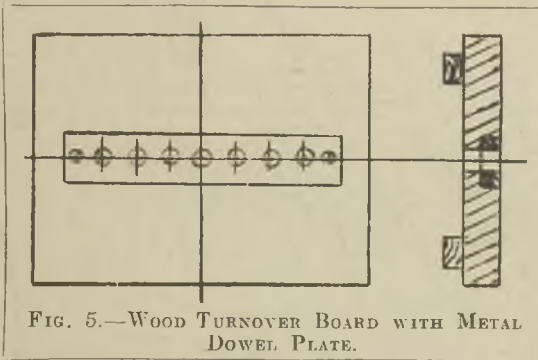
WOOD TURNOVER BOARD WITH METAL DOWEL PLATE.
